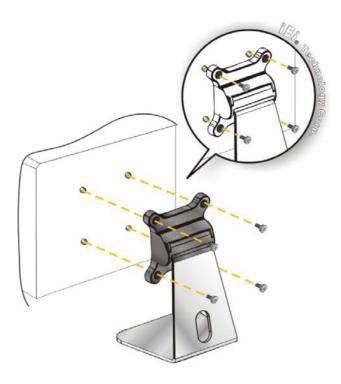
Stand Mounting (Stand-A/Bxx)
